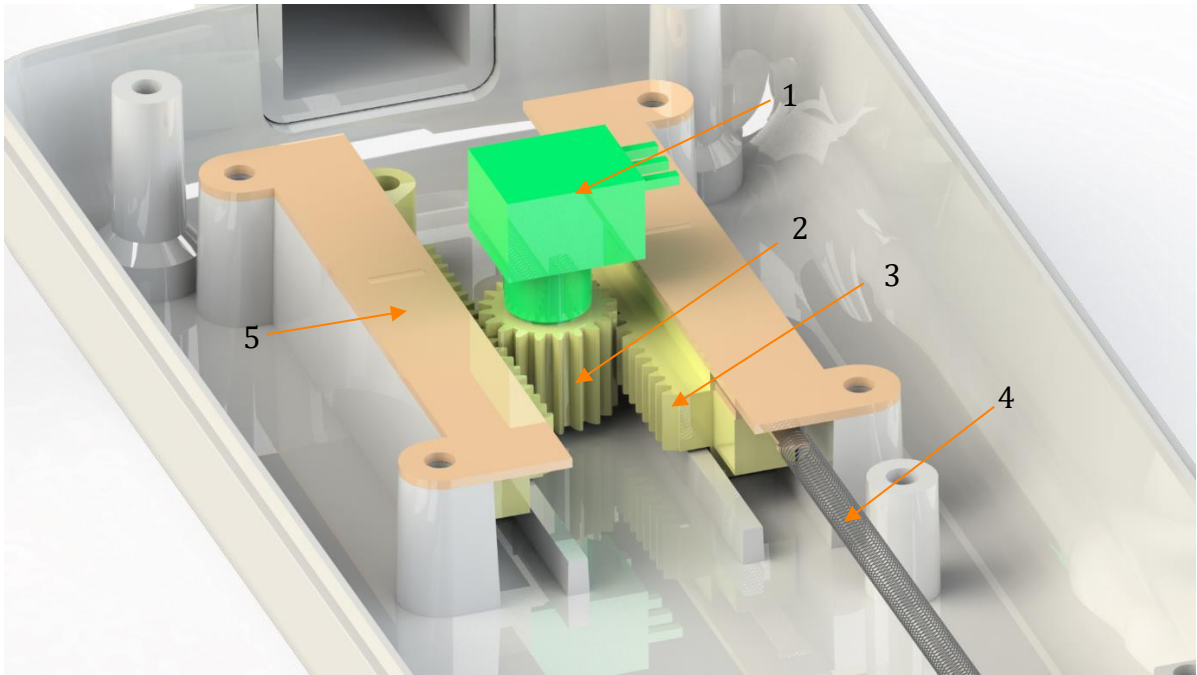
Bending Mechanism. The components of the Bending Mechanism are (1) Rotating Potentiometer, (2) Pinion Gear, (3) Rack Gear, (4) Nitinol Spring, and (5) Conductive Rail.
